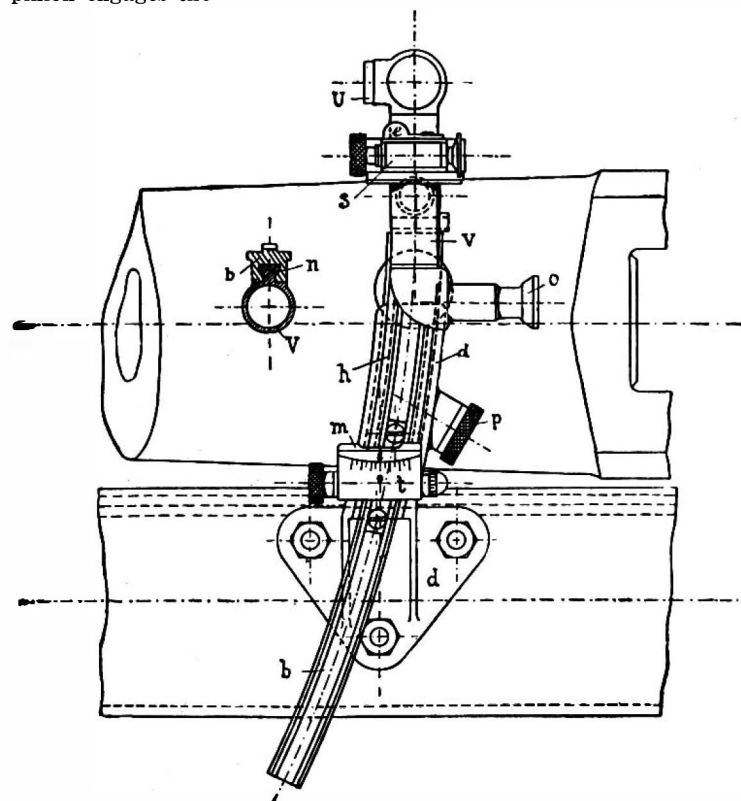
Side View of Telescope, Showing Bent Tangent Rod.
